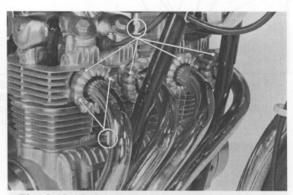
① Joint nuts ② Exhaust pipe joints
